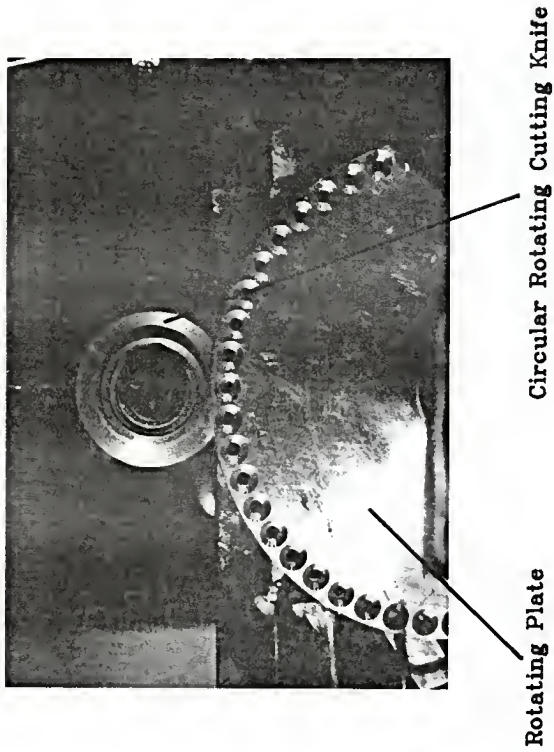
Top View of the Rotary Knife and Rotating Plate Assembly
